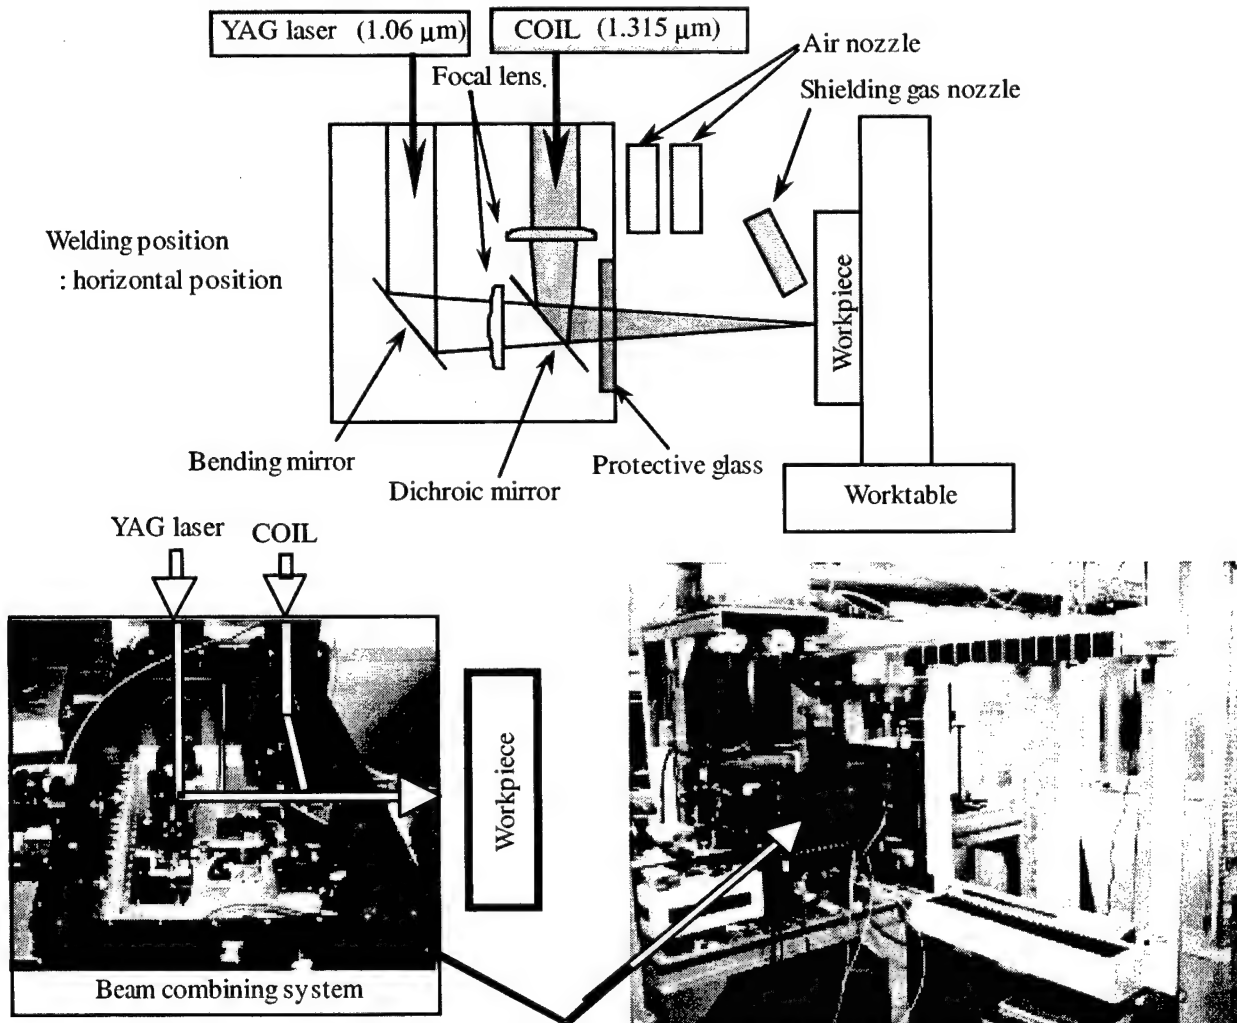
Welding apparatus of the horizontal position welding
